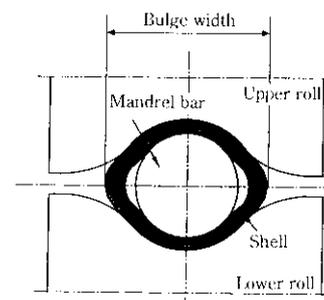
Cross section profile of shell in rolling at mandrel mill
